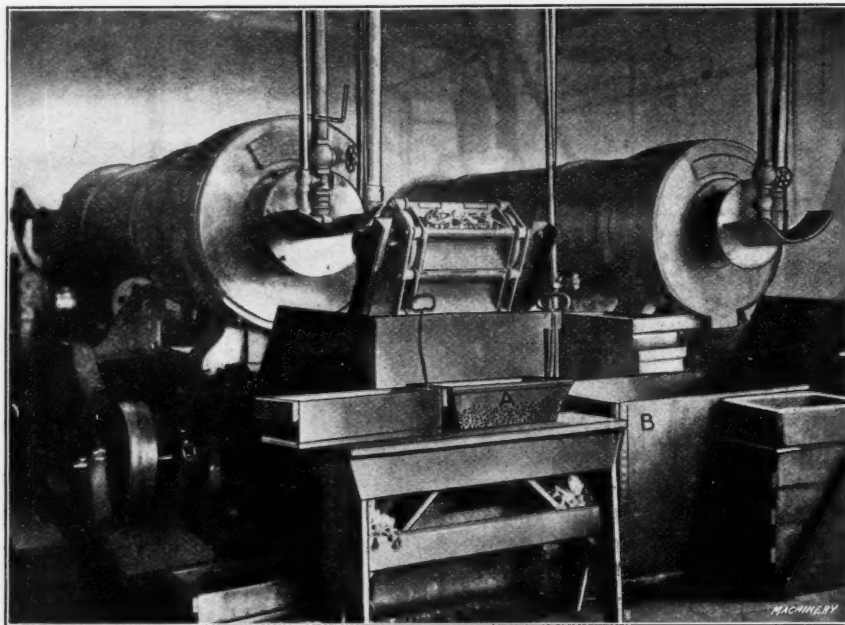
Two Rotary Hardening Furnaces for heat-treating Carriage and Stove Bolts
